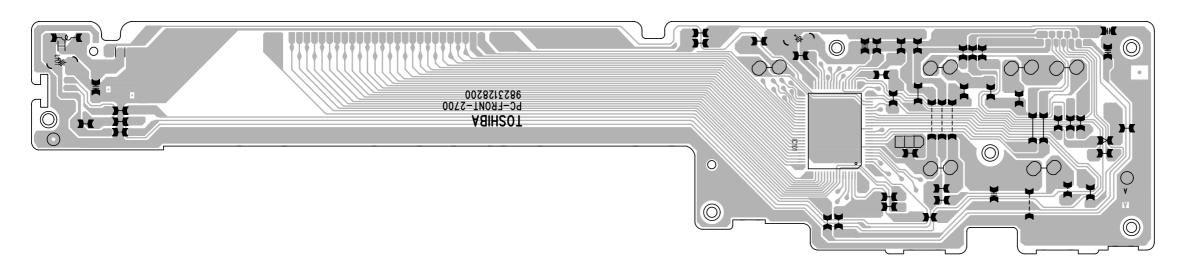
EU03 Front Display PC Board (Bottom Side)
